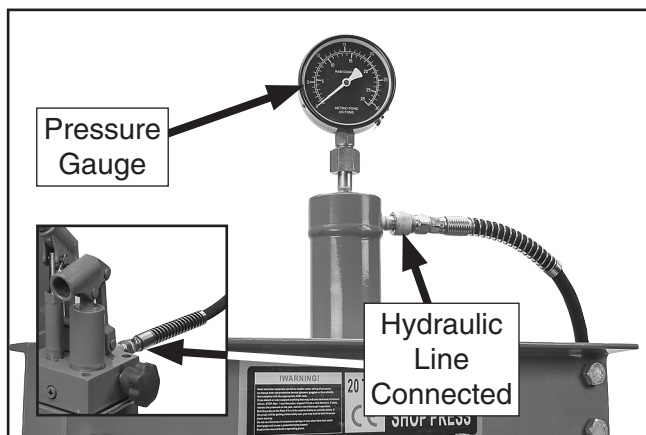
Pressure gauge and hydraulic line connected to hydraulic ram.
